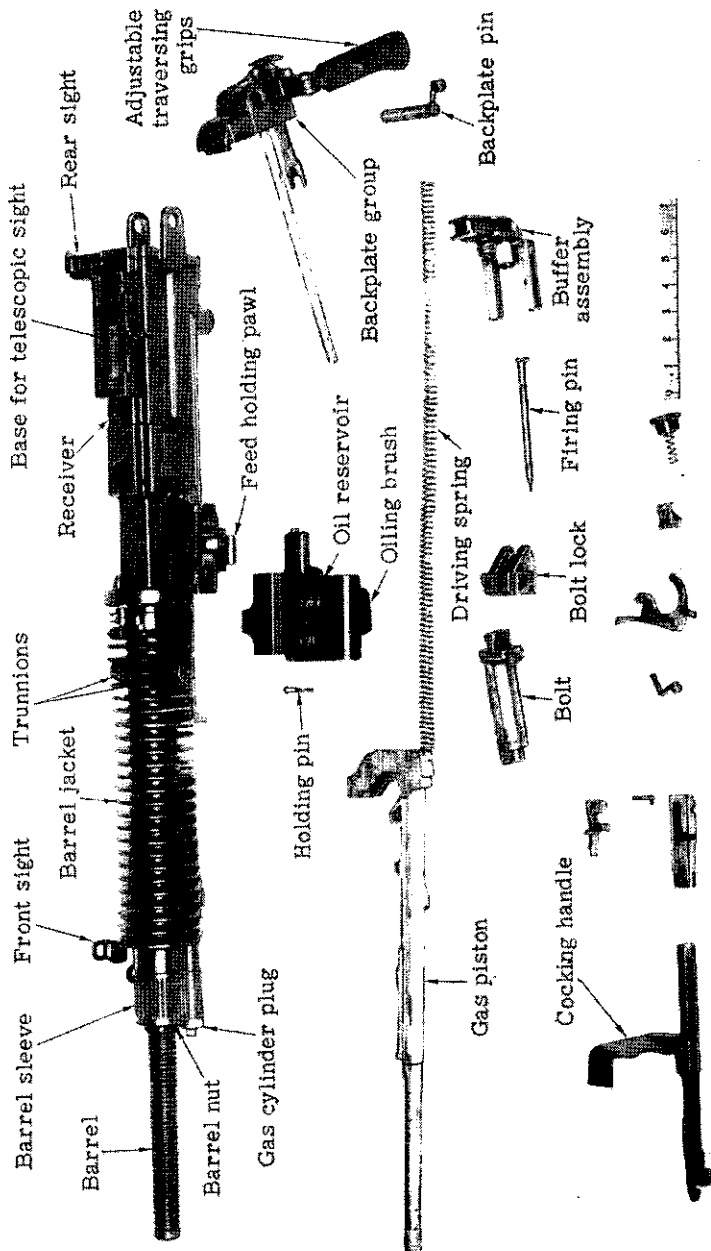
Model 92 (1932) 7.7-mm heavy machine gun disassembled.
